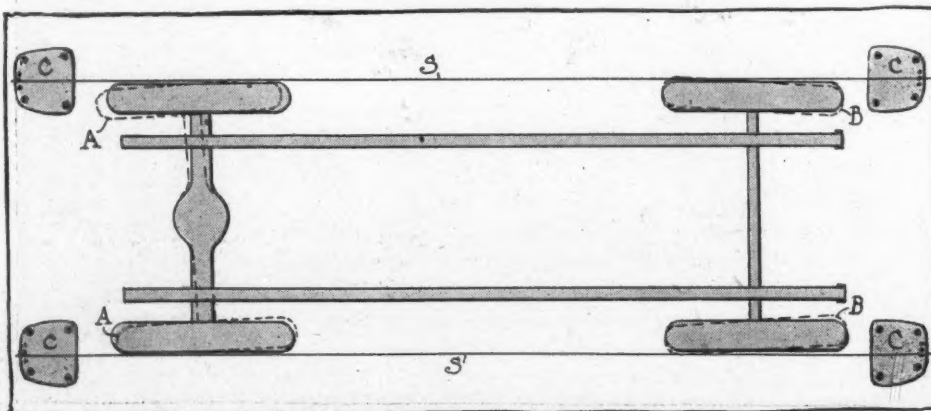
SHOWING A METHOD OF LINING UP MOTOR CAR WHEELS
